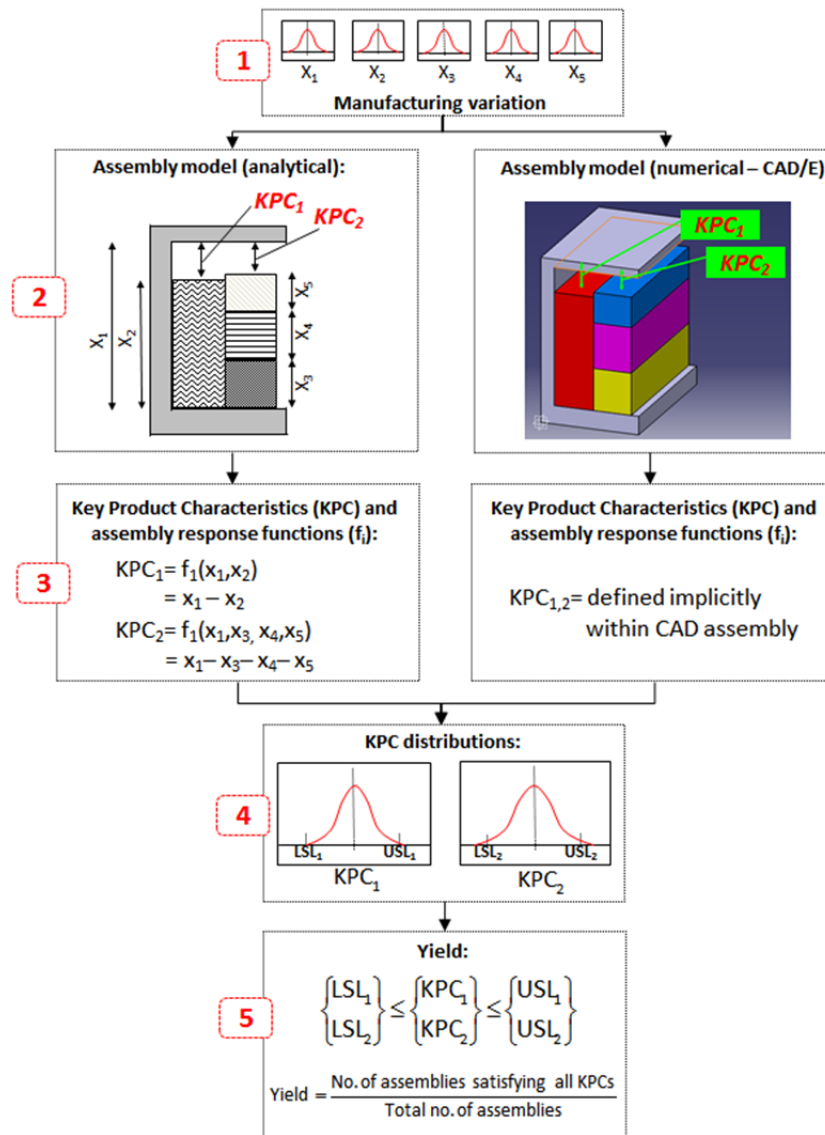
General tolerance analysis of a mechanical assembly. Stages are identified as per Section 4.2.
